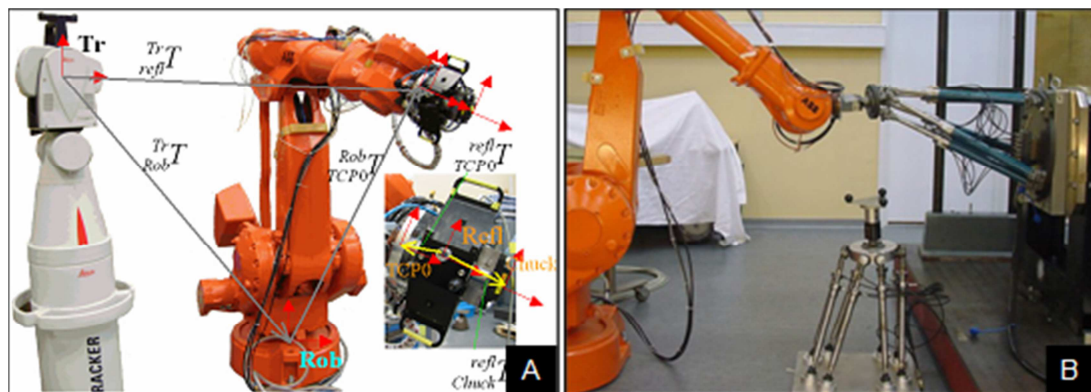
A) ABB robot guided by a Leica tracker with 6DOF probe. B) Robot positioning of hexapod fixture. [30]
